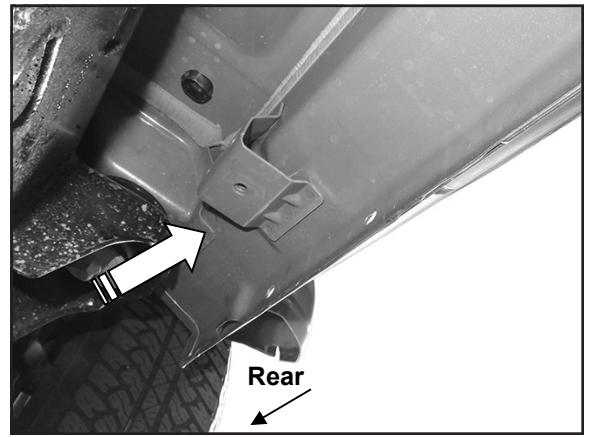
Attach driver/left Center Mounting Bracket to threaded hole in floor and front facing side of Support Bracket.
